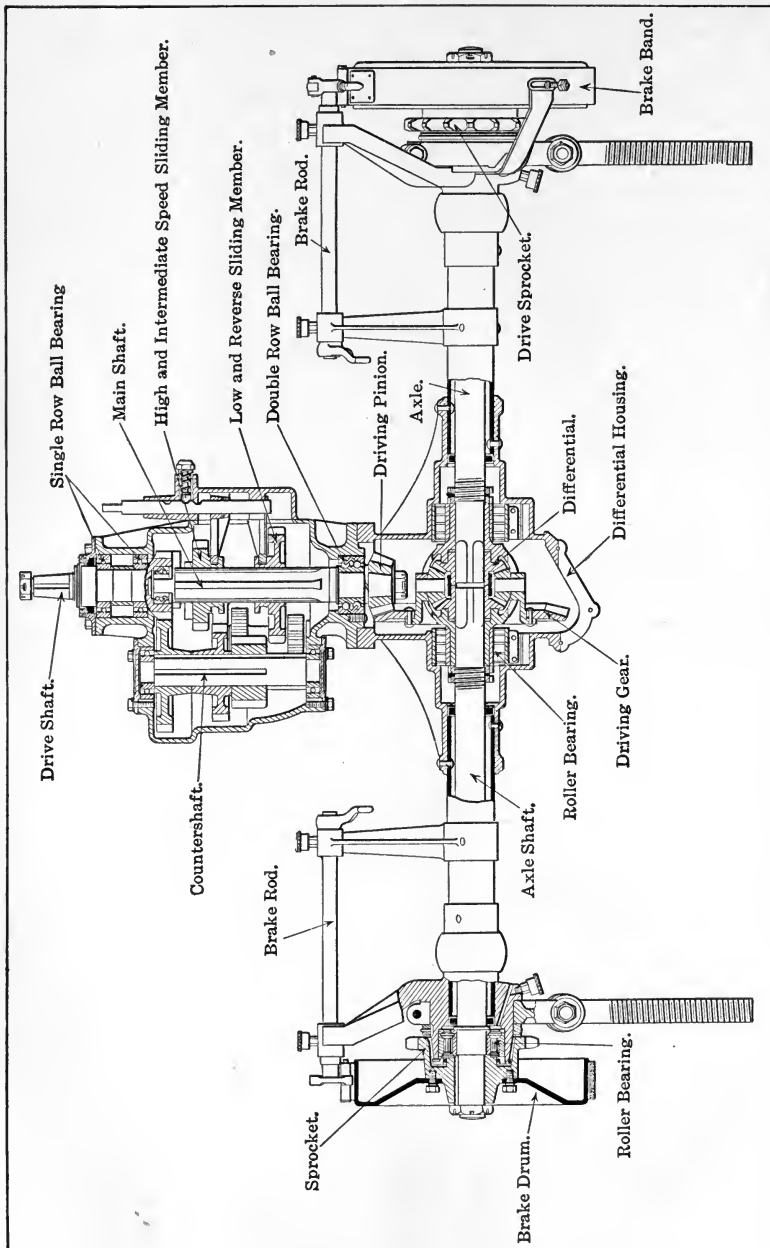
Countershaft and Three-Speed Sliding Gearset Mounted as a Unit Insures Positive Alignment of Speed-Changing and Power-Transmitting Elements.
